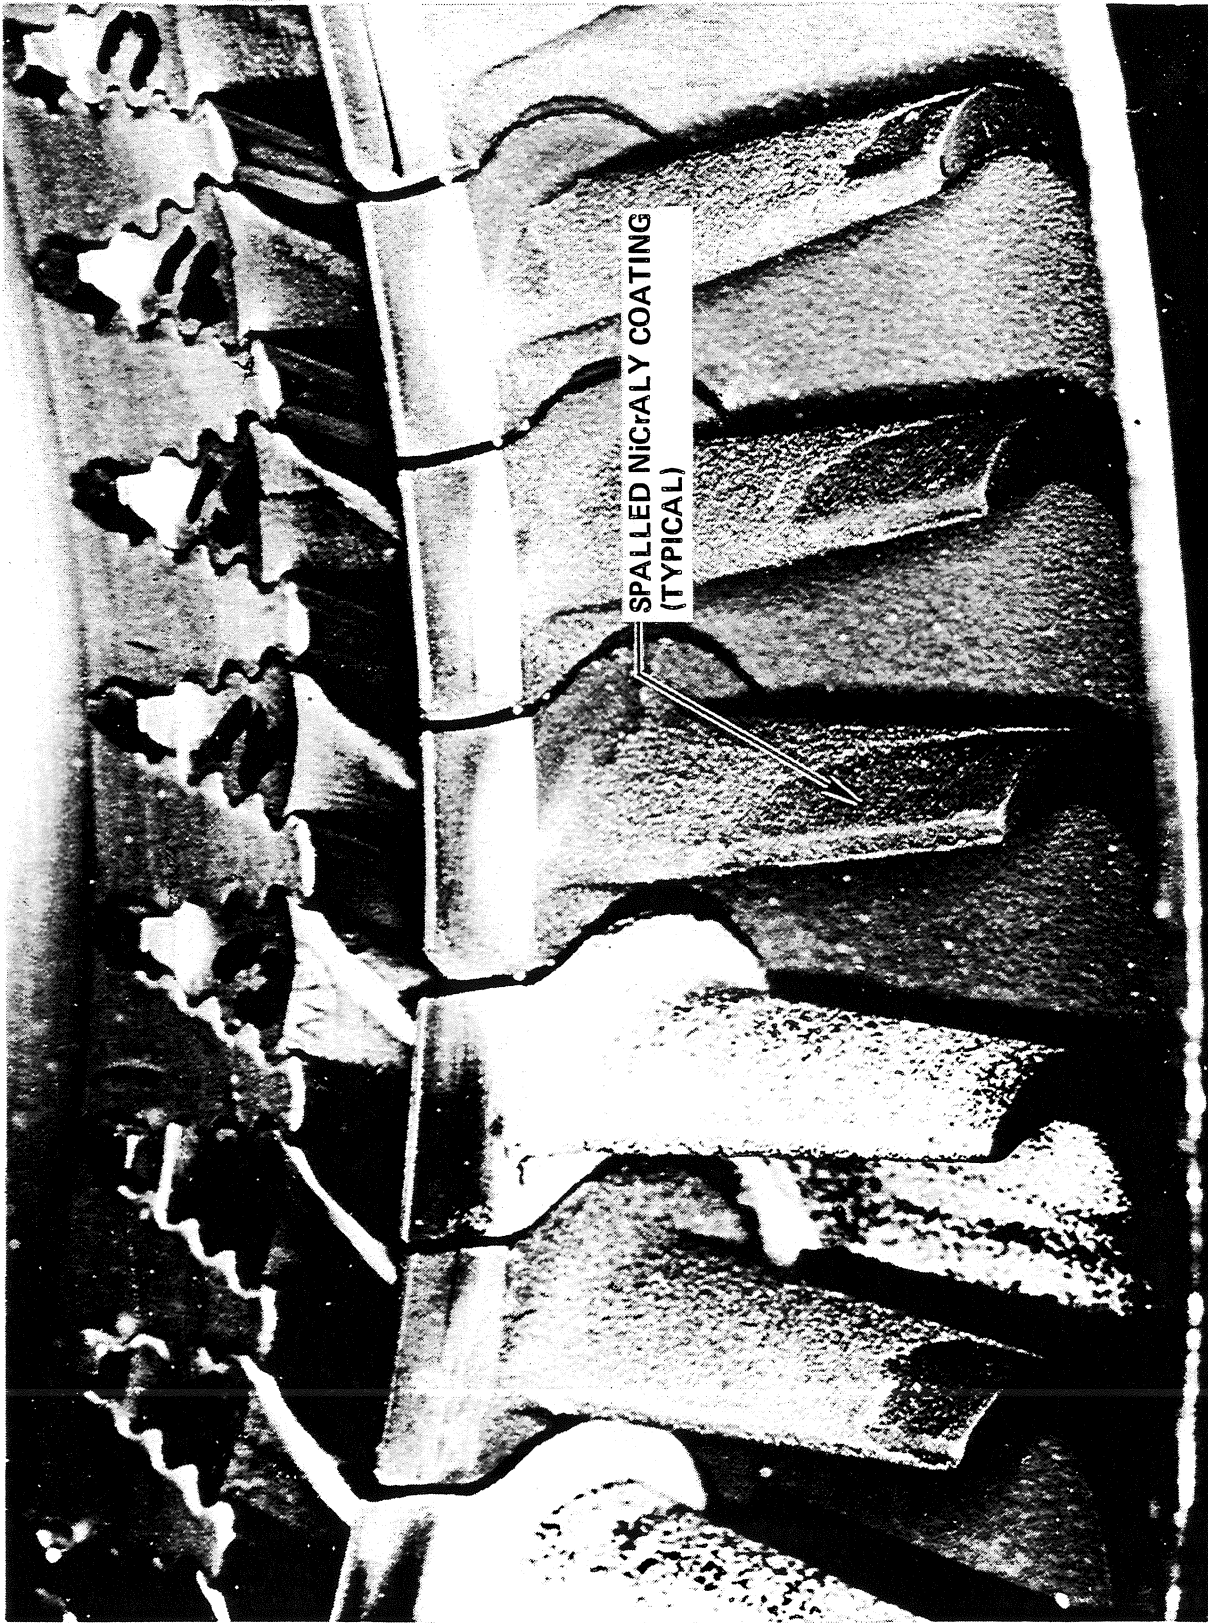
Spalled NiCrAlY Coating - First-Stage Turbine Blades
